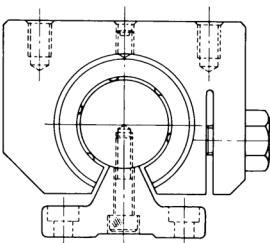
The OP-type fixing method allows adjusting the clearance.
